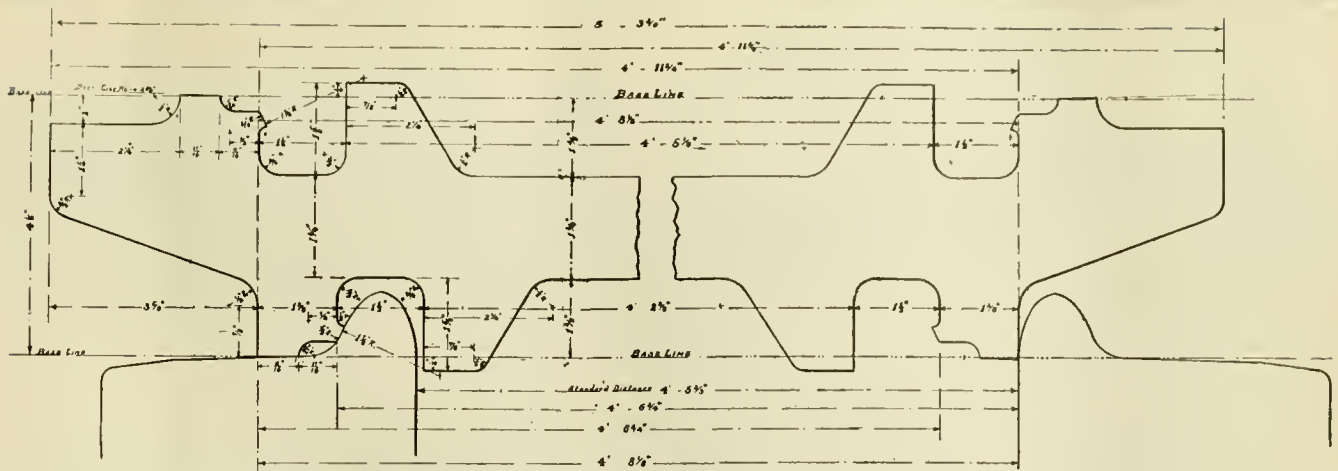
Standard Reference Gage for Mounting and Inspecting Wheels.
